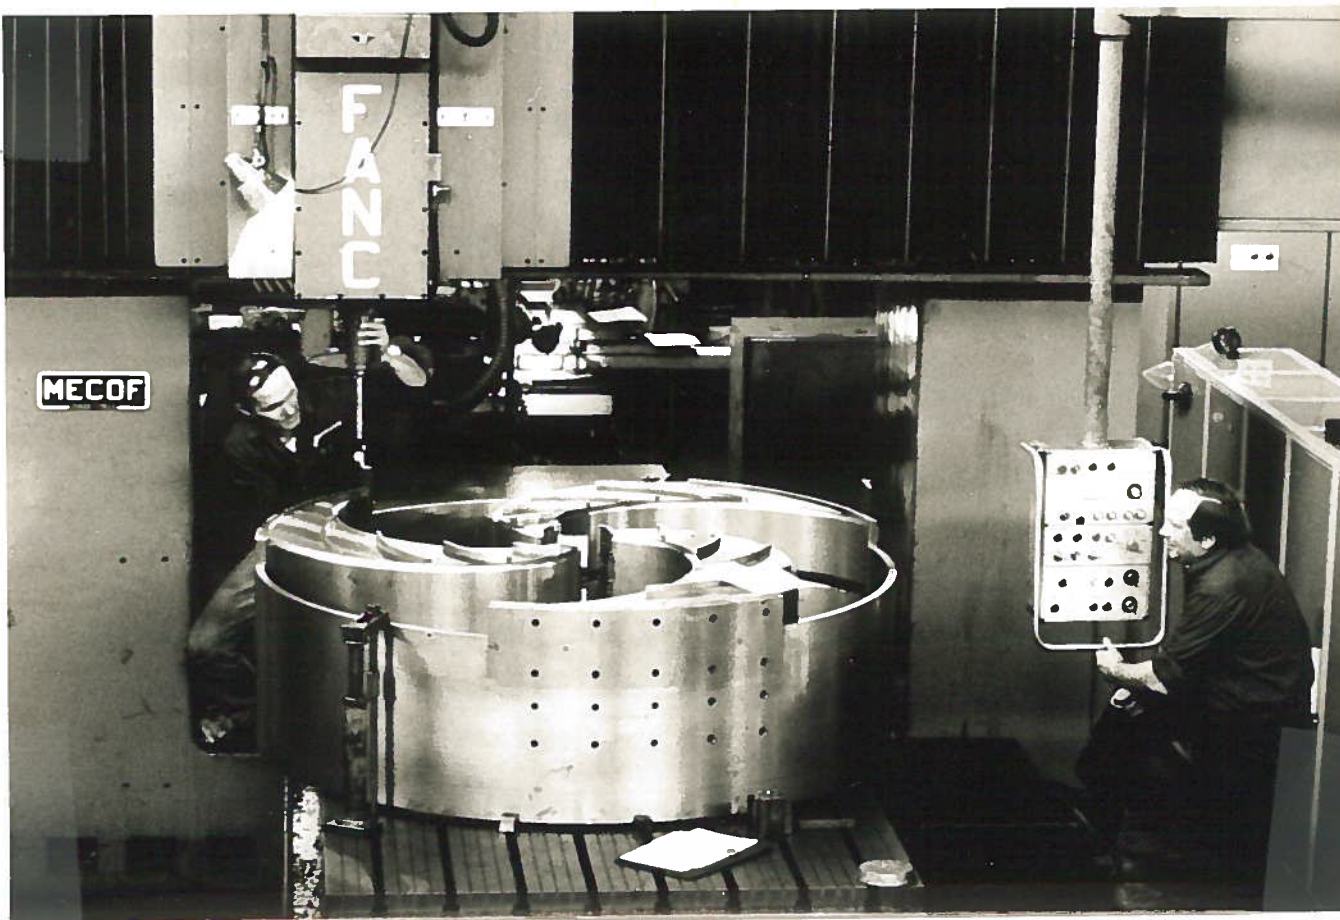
View of one set of polar expansions fully assembled on the relevant plate during acceptance tests.
